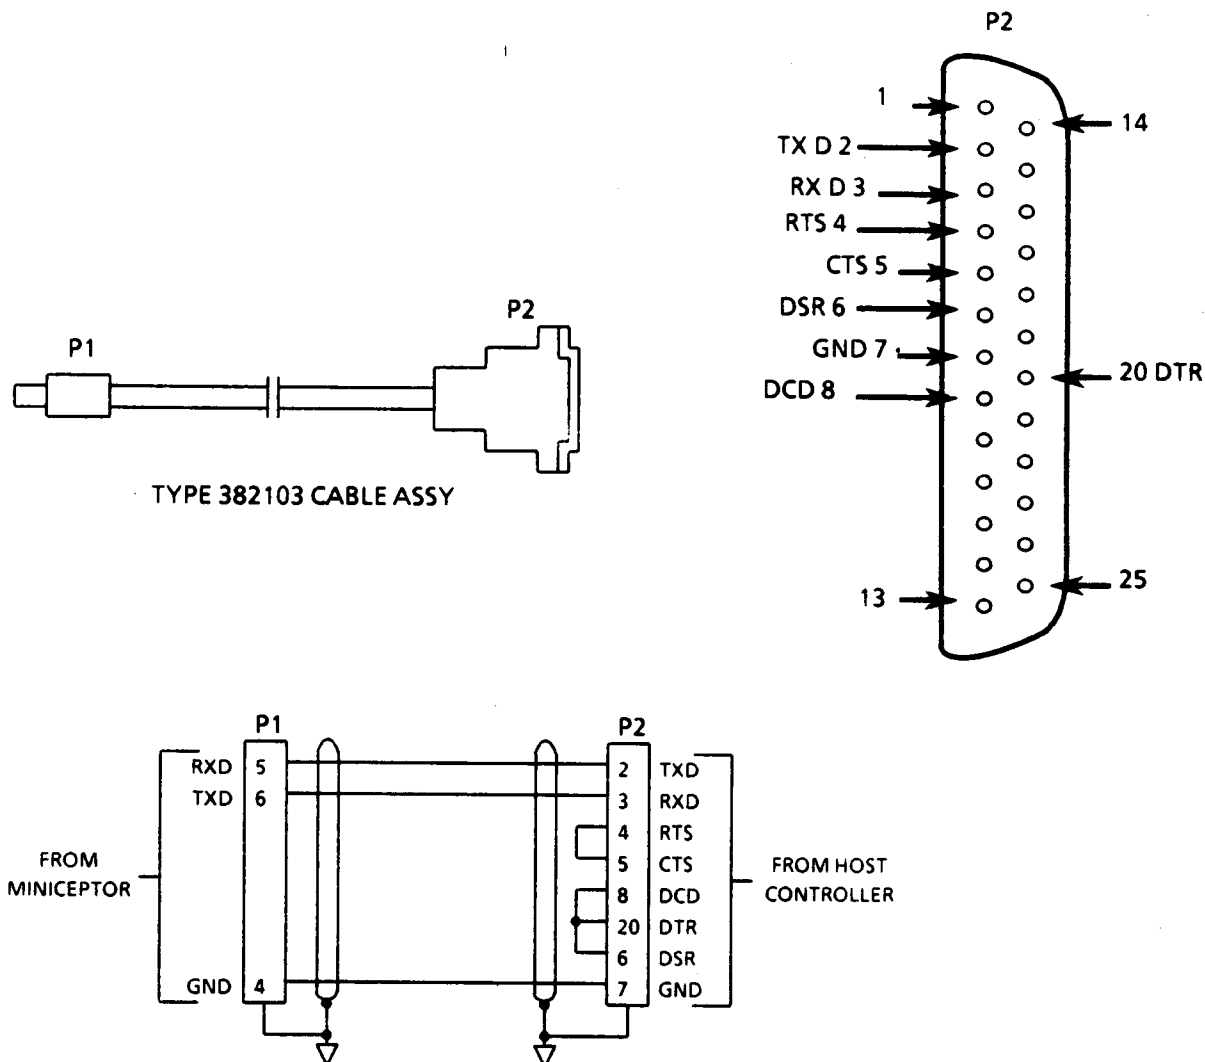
Optional RS-232 Adapter Cable, Type 382103
